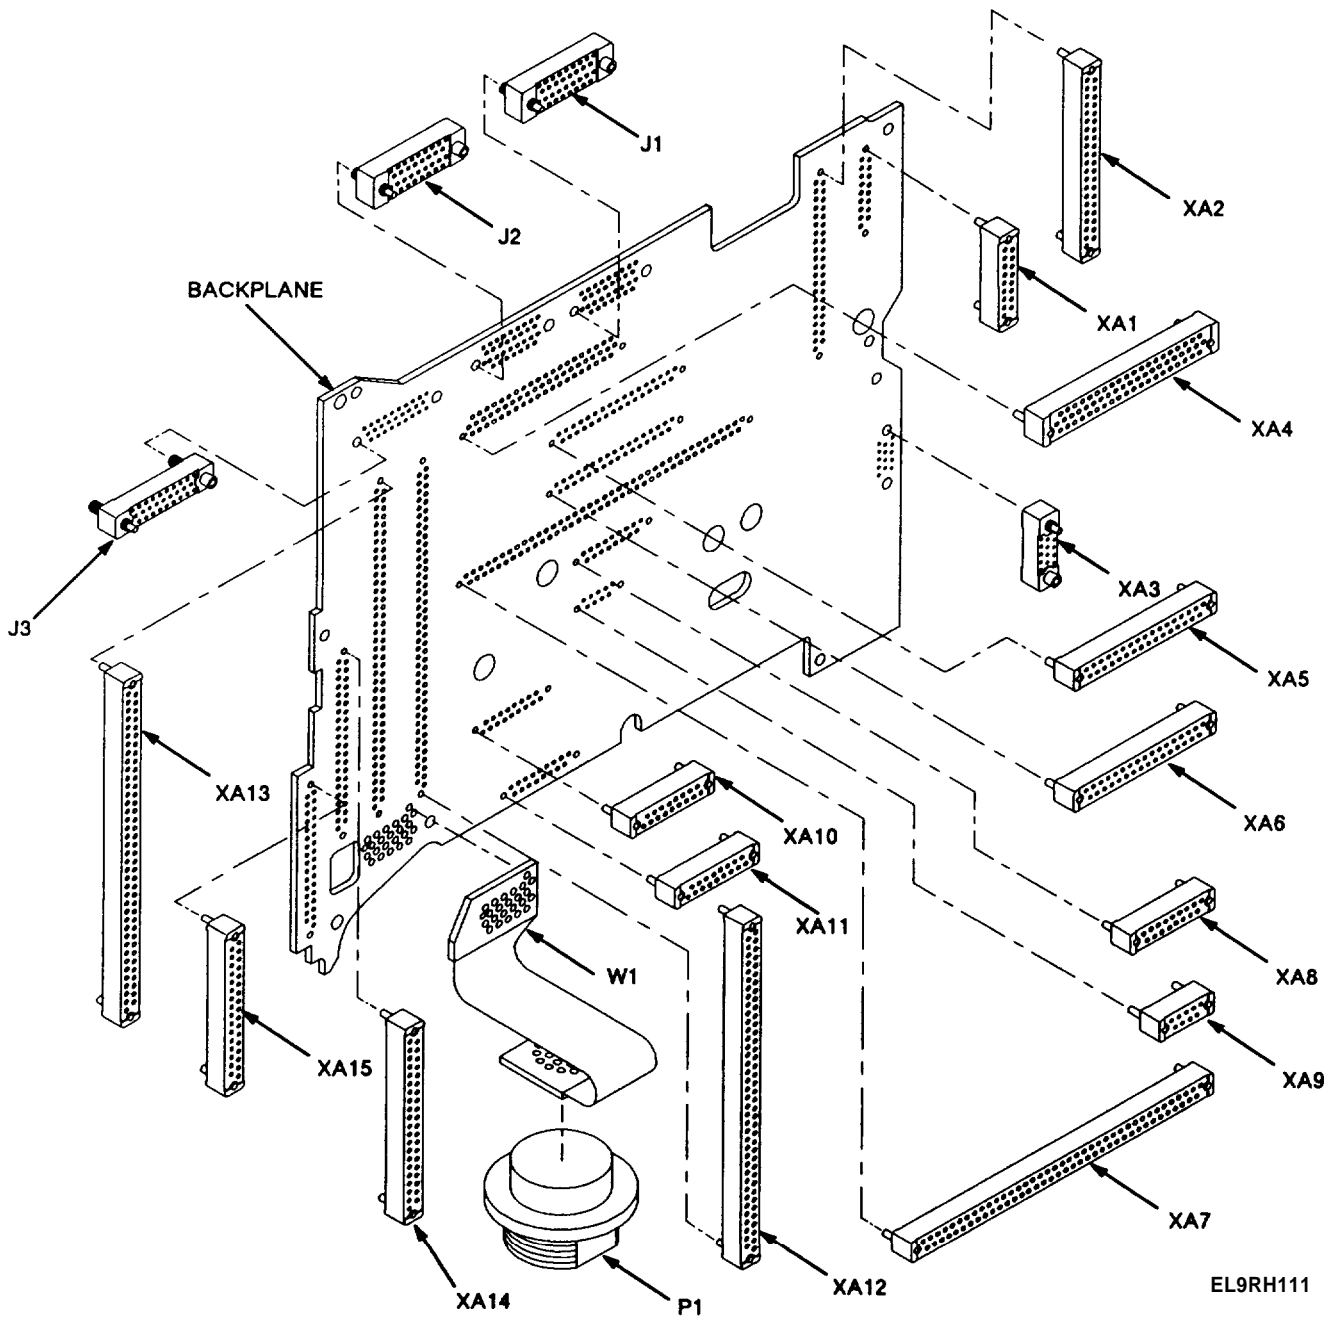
Component Layout of Backplane Assembly (Sheet 1 of 2)
